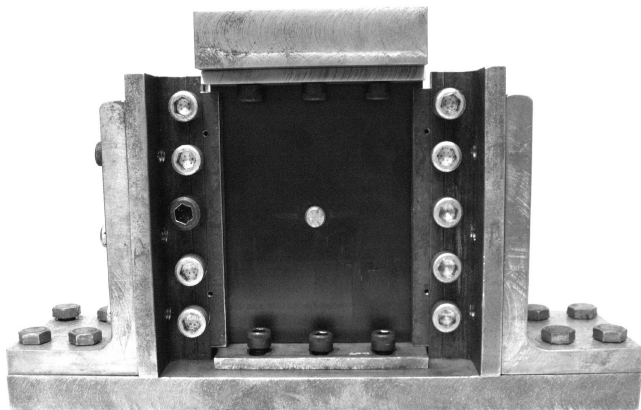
CAI test fixture with filled-hole specimen following lightning strike damage.
